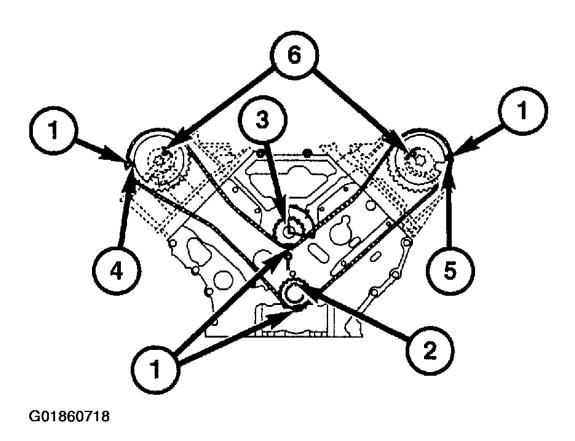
Removing Timing Chain Crankshaft Sprocket Courtesy of DAIMLERCHRYSLER CORP.
